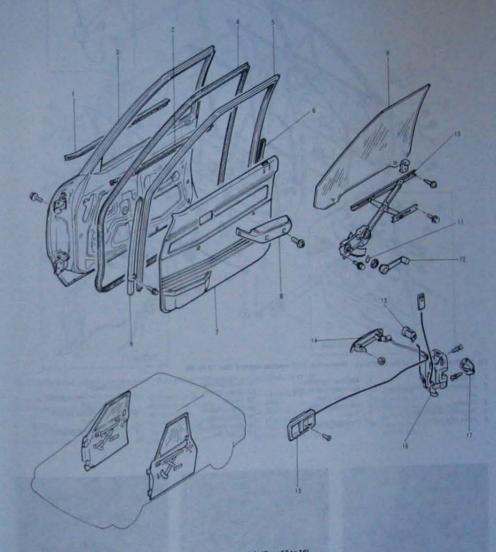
Exploded view of the front door - pre-September 1985 models (Secs 12 to 16)
